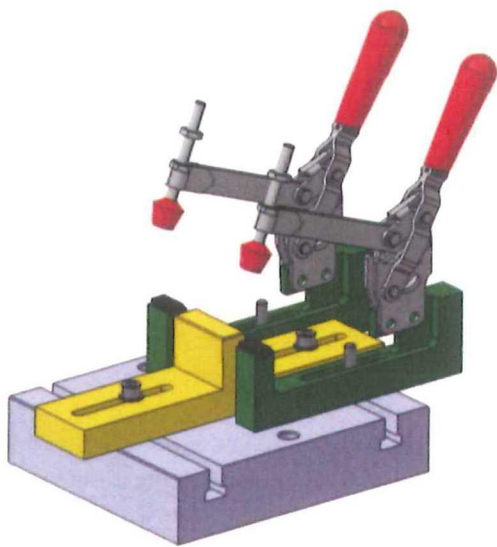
Fixture Z51414 with the Z51430 expansion especially designed to ultrasonically weld fuselage frames to the orthogrid panel.
